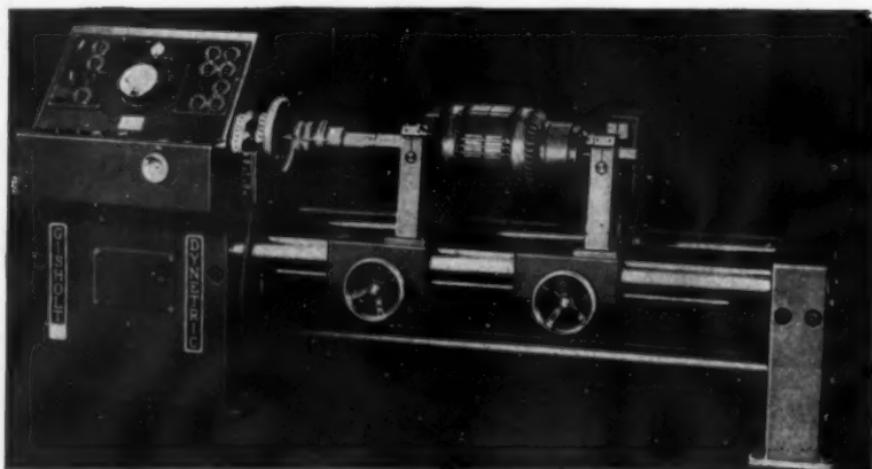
Type "U" balancing machine, set up for balancing large electric motor armatures.
